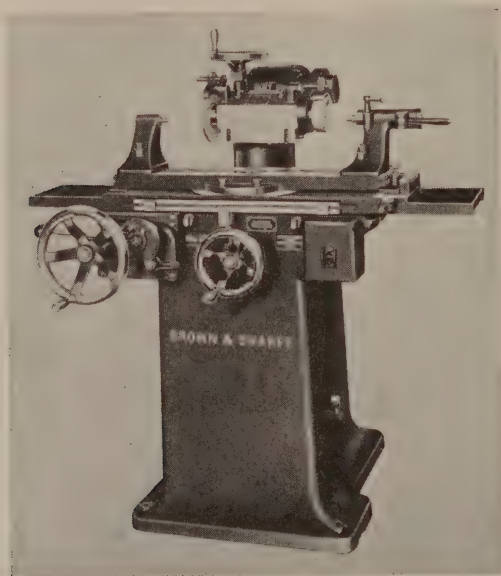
No. 10 Cutter and tool-grinding machine. Movement of table either by handwheel or hand lever is controlled by adjustable dogs. Swivel table permits angular settings. Wheel-spindle column has vertical adjustment and transverse movement. Universal head can be set at any angle to 90 deg., either side of center line, in both vertical and horizontal planes. Furnished with complete equipment of attachments. (*Courtesy of Brown & Sharpe Manufacturing Company.*)
